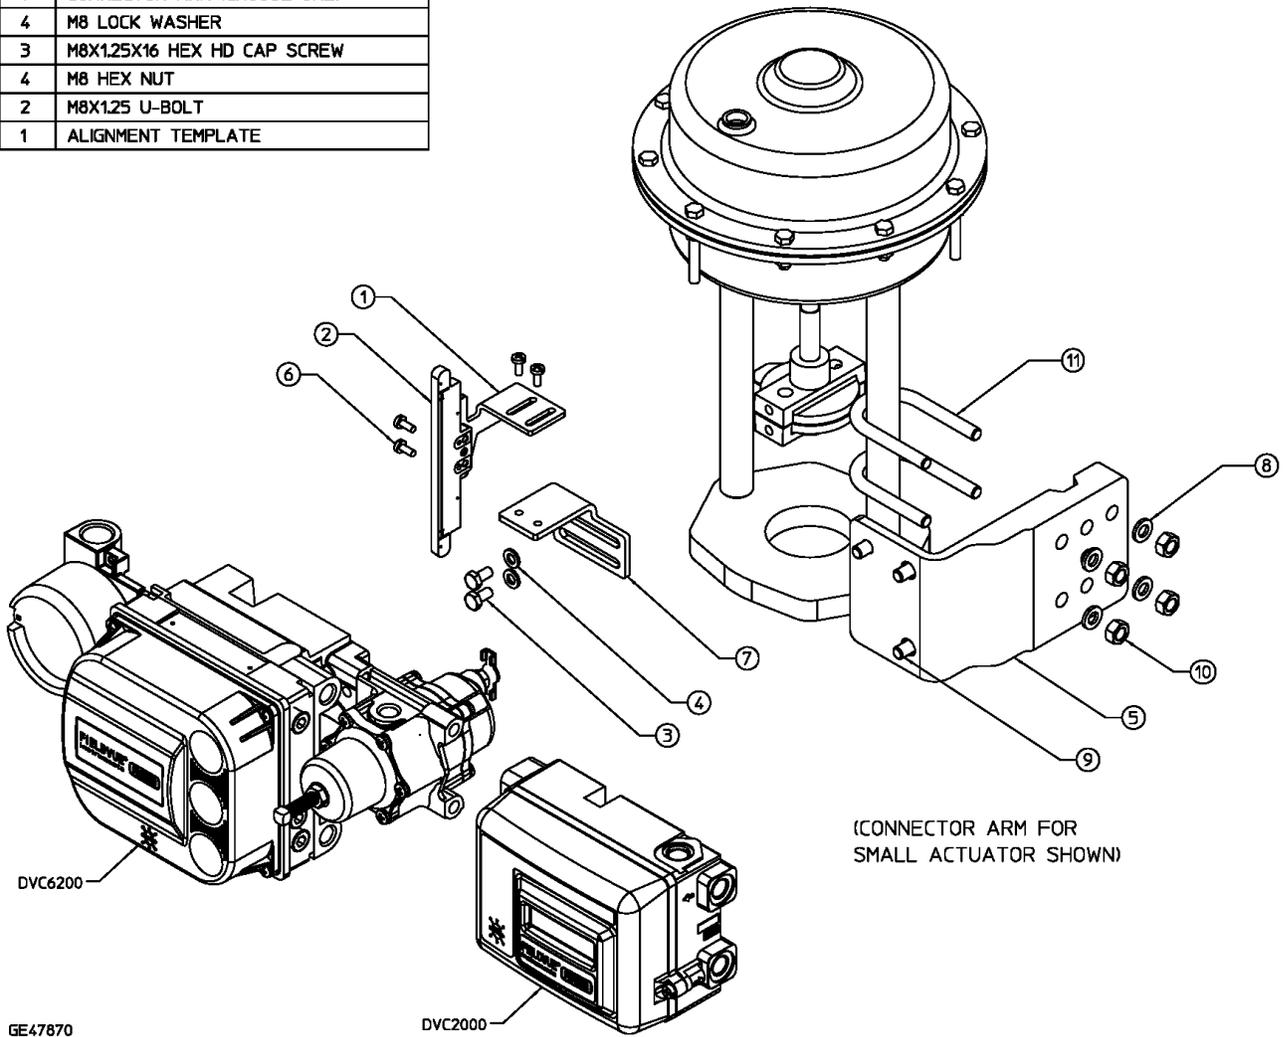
Mounting Parts Identification for Pillar Style Mounting
